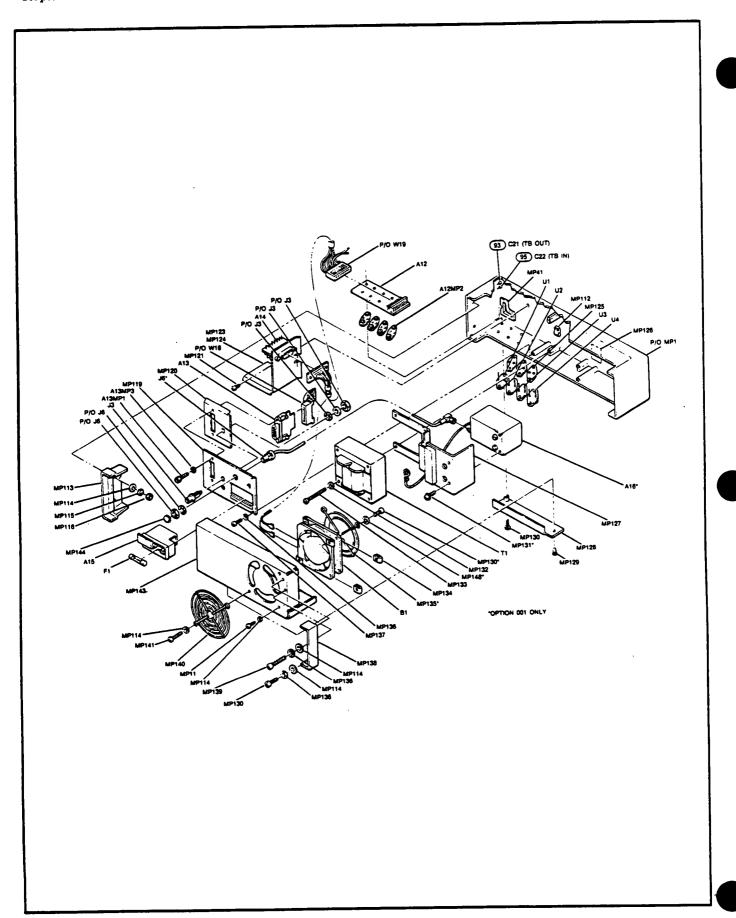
(2425A to 2509A). Rear-Panel, Parts Identification
